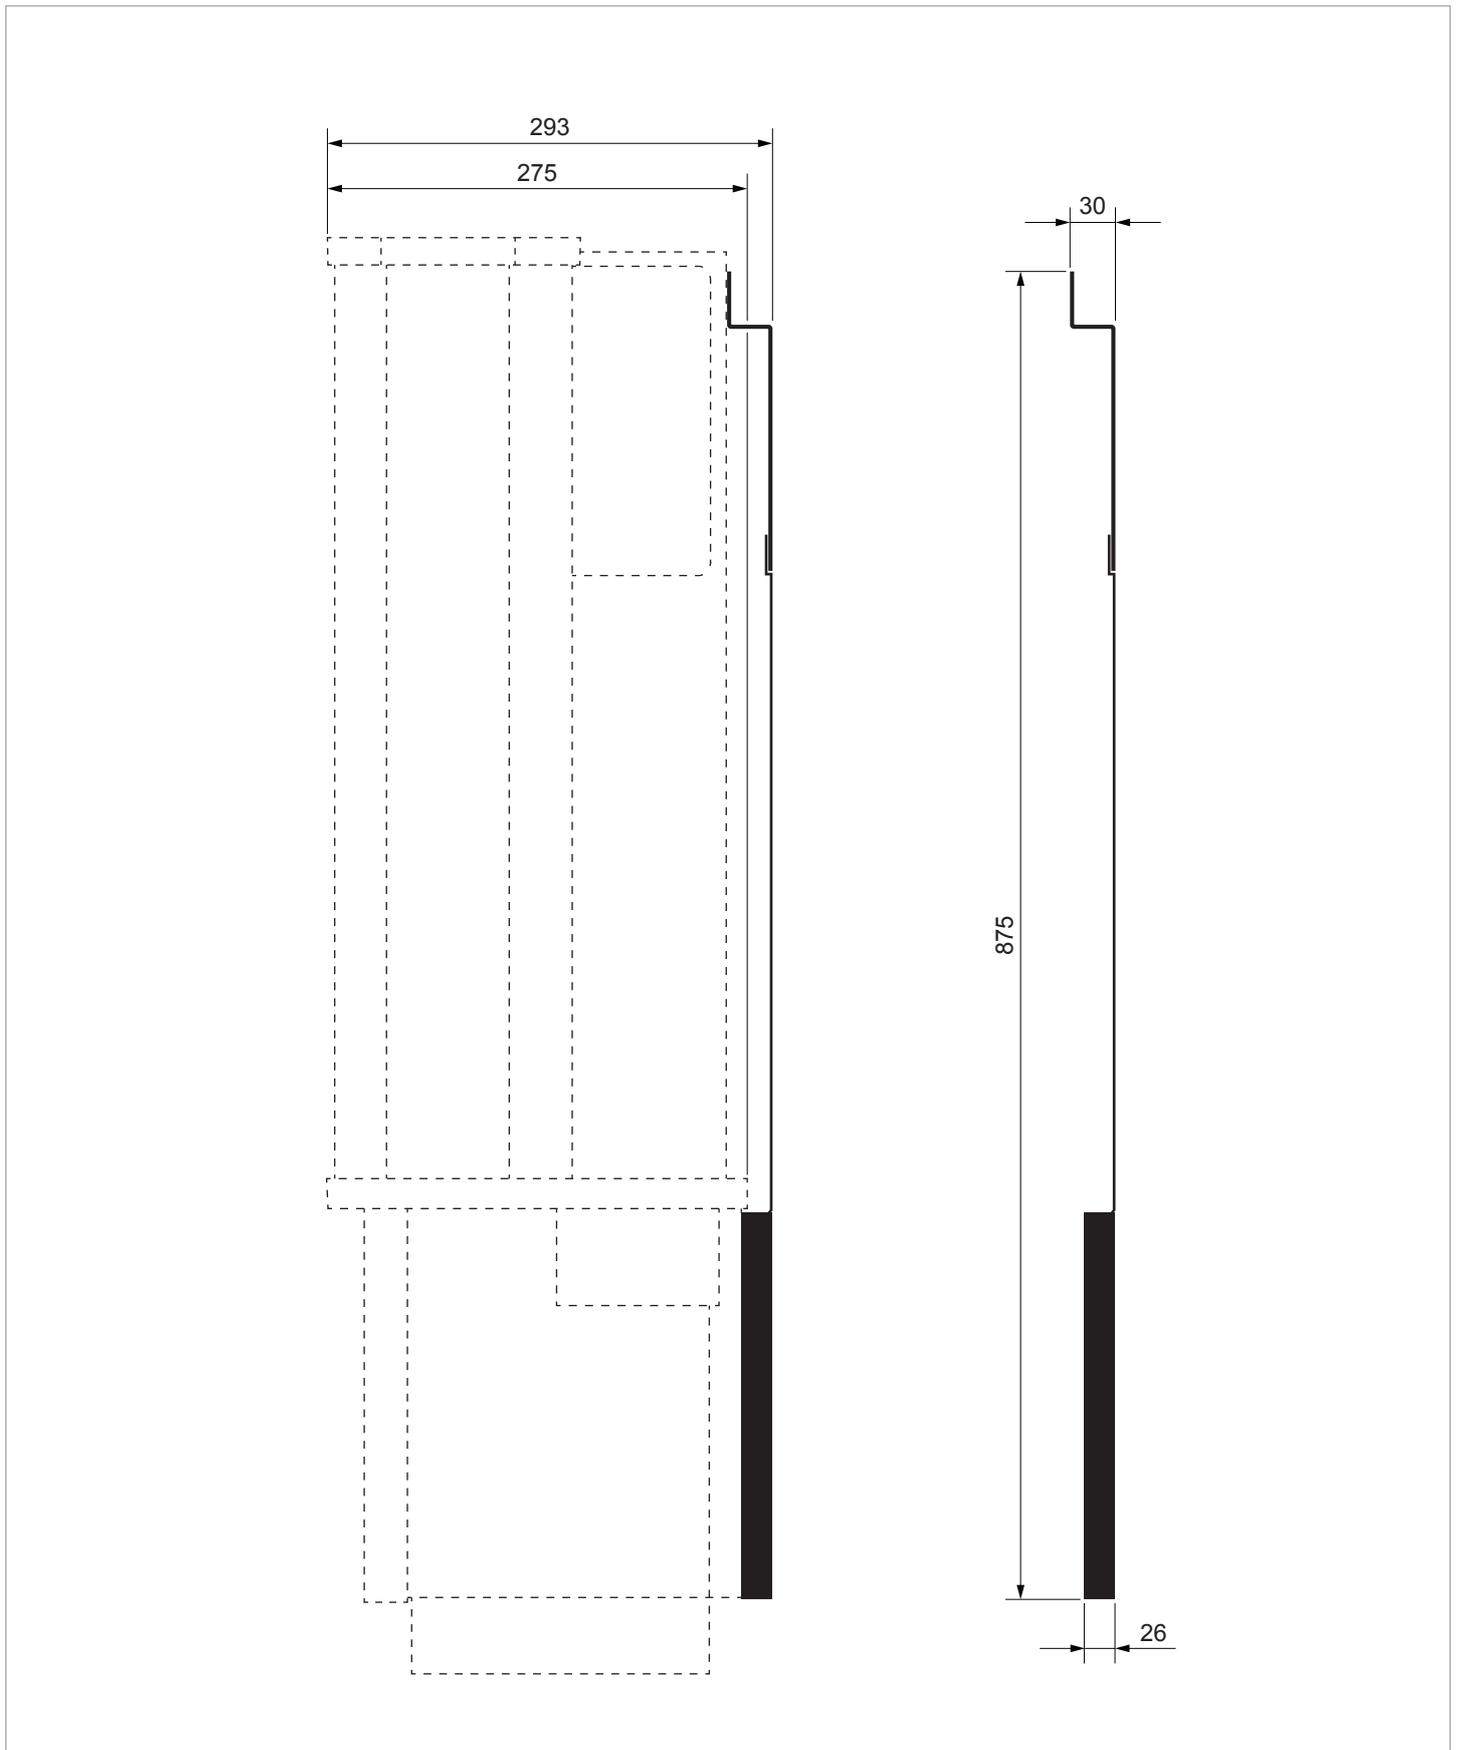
Dimensions, viewed from the right (data in mm)
